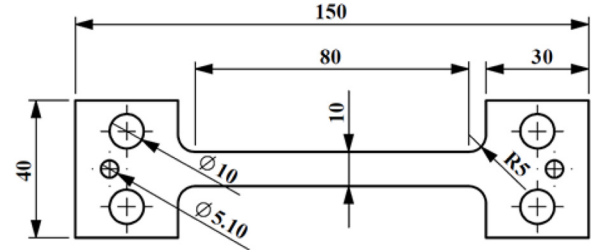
Specimen geometry and dimensions for Gleeble tensile tests (the unit of dimensions in the figure is mm).
